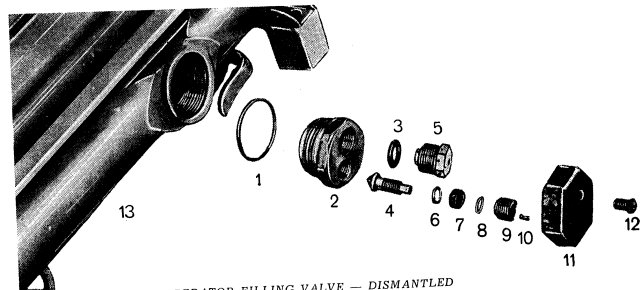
RECUPERATOR FILLING VALVE — DISMANTLED
